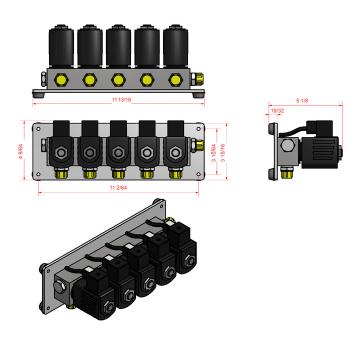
Valve block 4+1 INDUCT dimensions (in inch)
